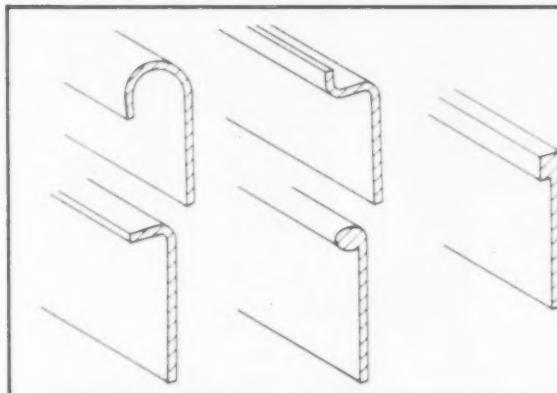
Lip designs which are used to improve the rigidity of the open edges of molded parts.
